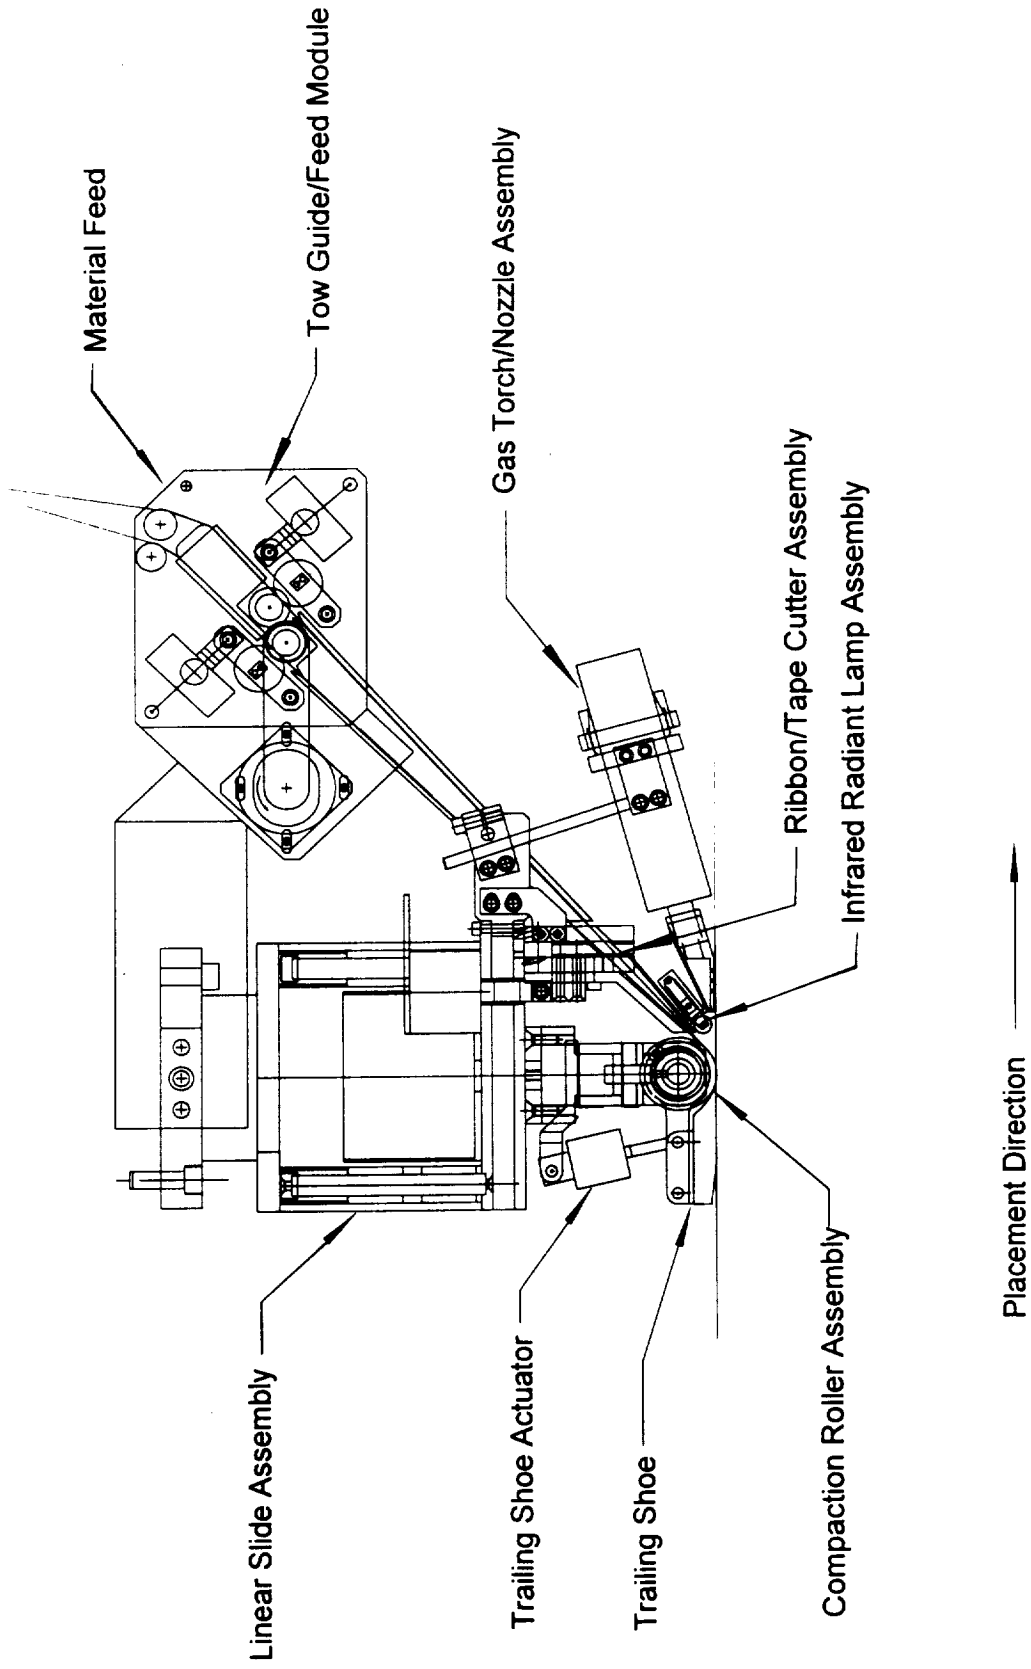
NASA Langley fiber placement machine heated-head assembly.
